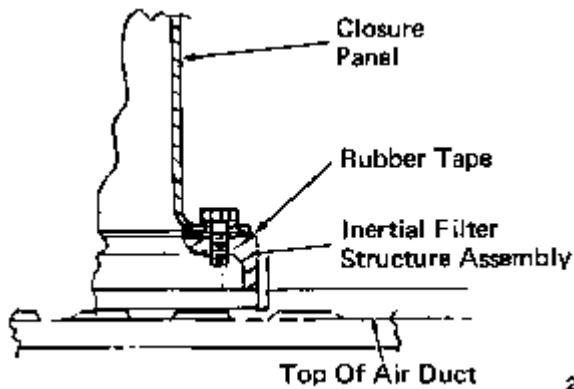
Cutaway Of Weather Seal Cemented To Inertial Filter Structure Assembly Batten
